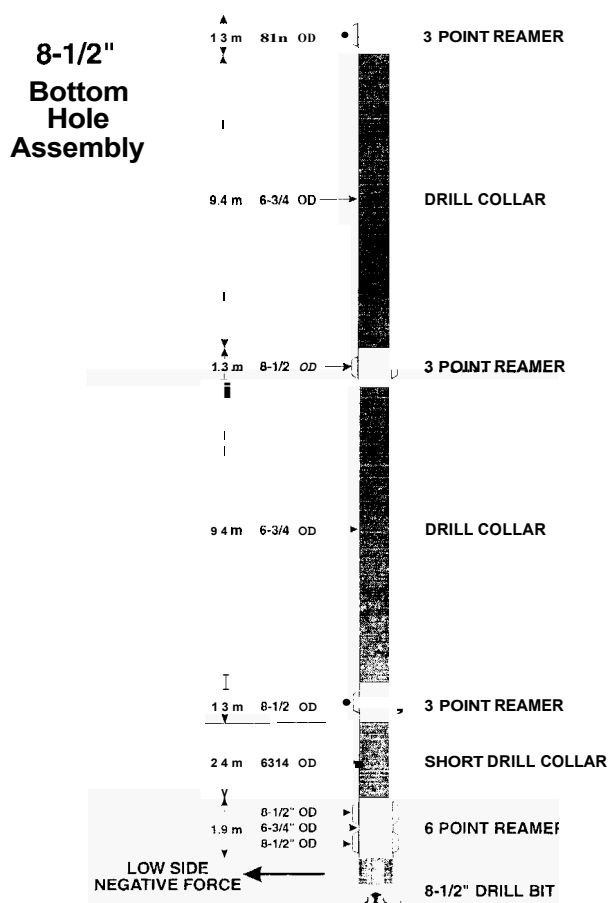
Stabilized bottom hole assembly used during the extension of GPK-1
